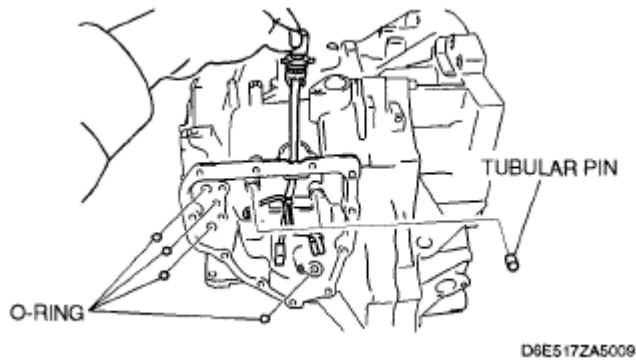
Locating O-Rings And Tubular Pins At Transaxle Case
